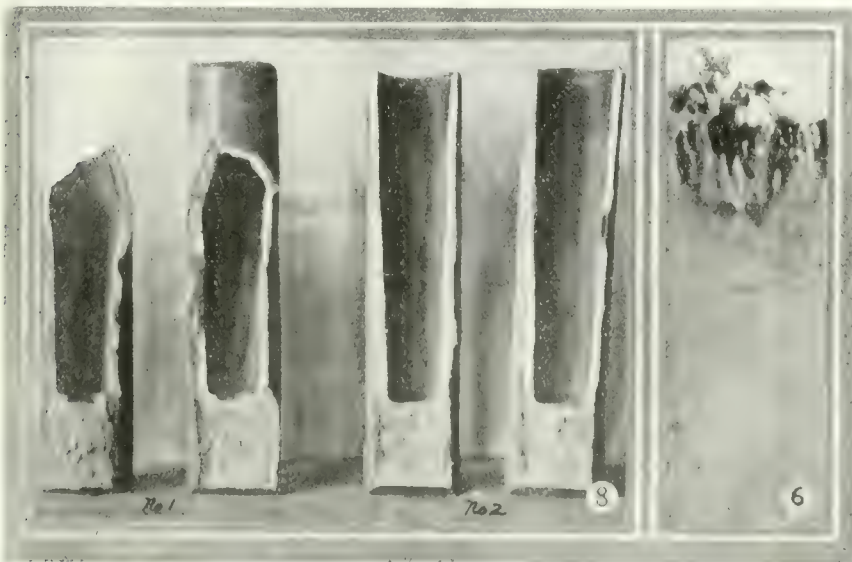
Etching on axis line to determine amount of segregation. Fig. 8. Steel forgings from blanks (1) and (2) of Fig. 7, split open for inspection.
